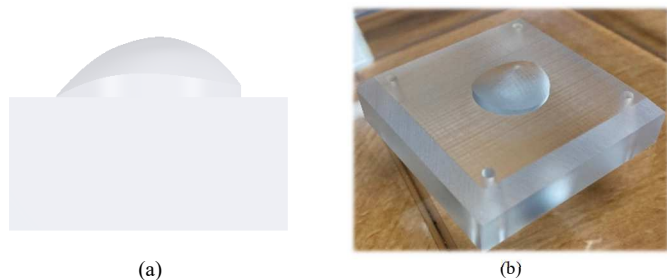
Optimized shaped quartz lens: (a) side view of the model, and (b) photograph of the fabricated prototype.
